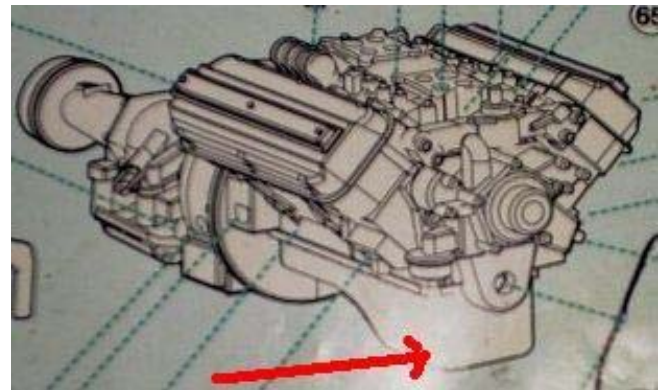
I started with the engine, which proved to be a model within itself. The basic components: block/tranny, oil pan, transmission pan, cylinder heads, front cover, and intake manifold should be assembled and painted aluminum. I did so and painted them Testor's Aluminum Plate buffing metalizer.
